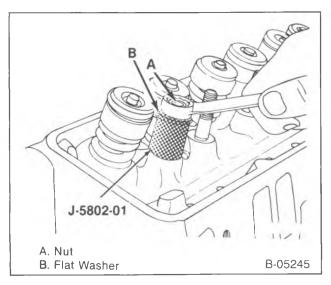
Removing the Rocker Arm Stud (5.0L and 5.7L Engines)
